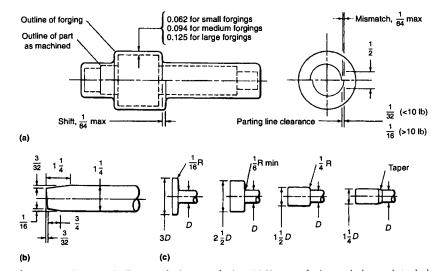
Machining stock allowances for hot upset forgings. (a) Hot upset forging terminology and standards. (b) Probable shape of shear-cut ends. (c) Variation of corner radius with thickness of upset. These parts are the simplest forms of upset forgings. Dimensions given in inches
